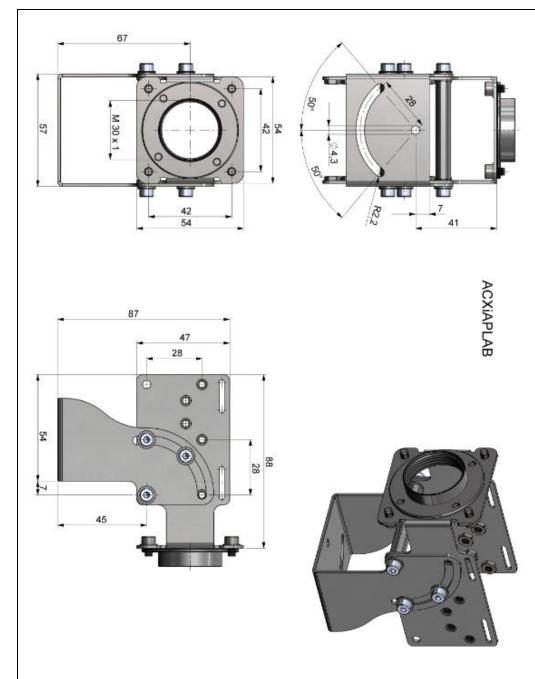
Mounting bracket (ACXIAPLAB), dimensions [mm]
